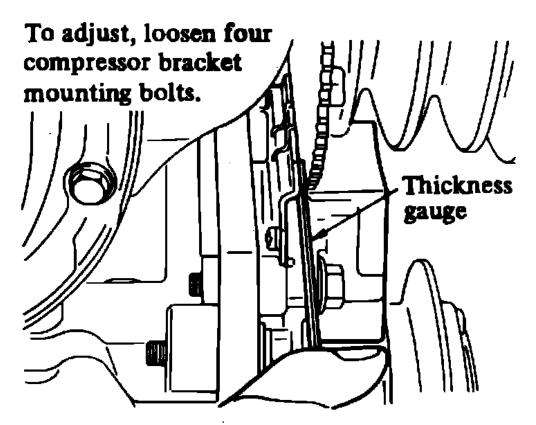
Adjusting crankshaft angle sensor radial dimension "S":
